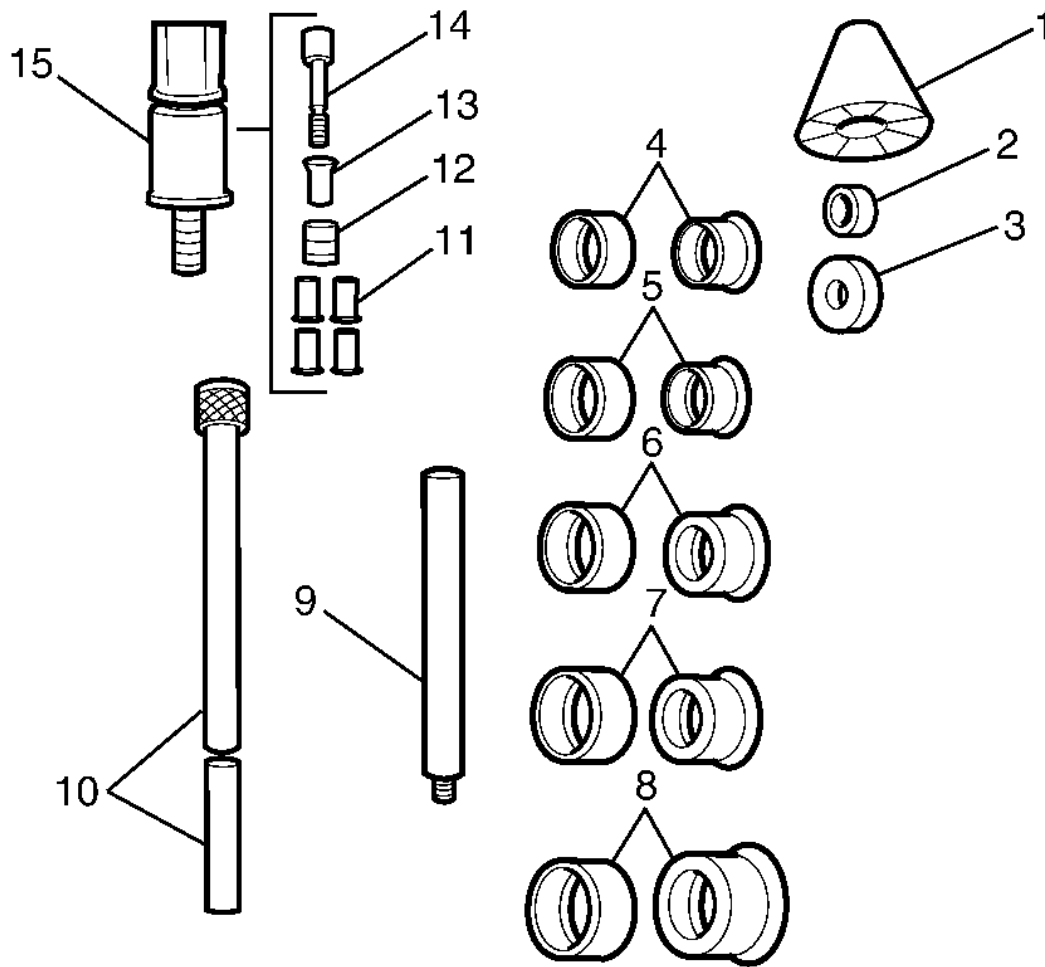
View Of Expander Assembly, Shaft, Cone, Sleeve, Jaws, Bearing Drivers, Driver Bars, Washers & Guide Cone
